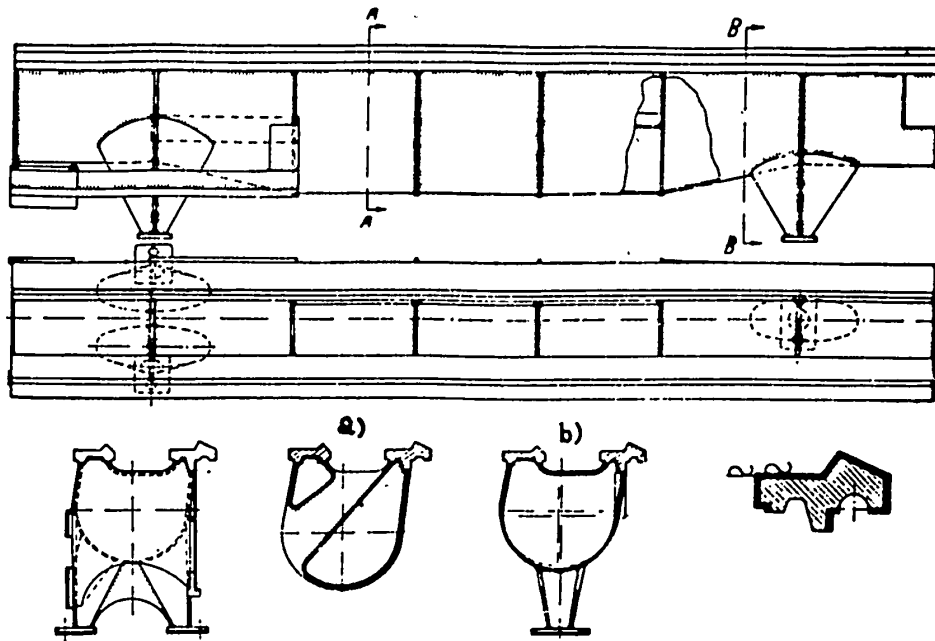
A Stamped-Welded Lathe Bed
